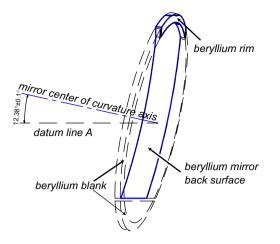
A drawing showing the outline of the mirror (continuous line) within the disc-shaped blank (dashed line) from which the mirror is machined. Datum line A is the horizontal axis.
